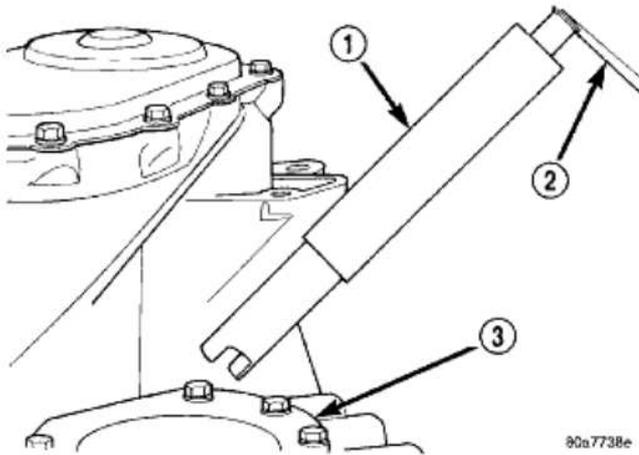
Installing Tool L-4436-A Into Differential & Onto Pinion Mate Shaft
